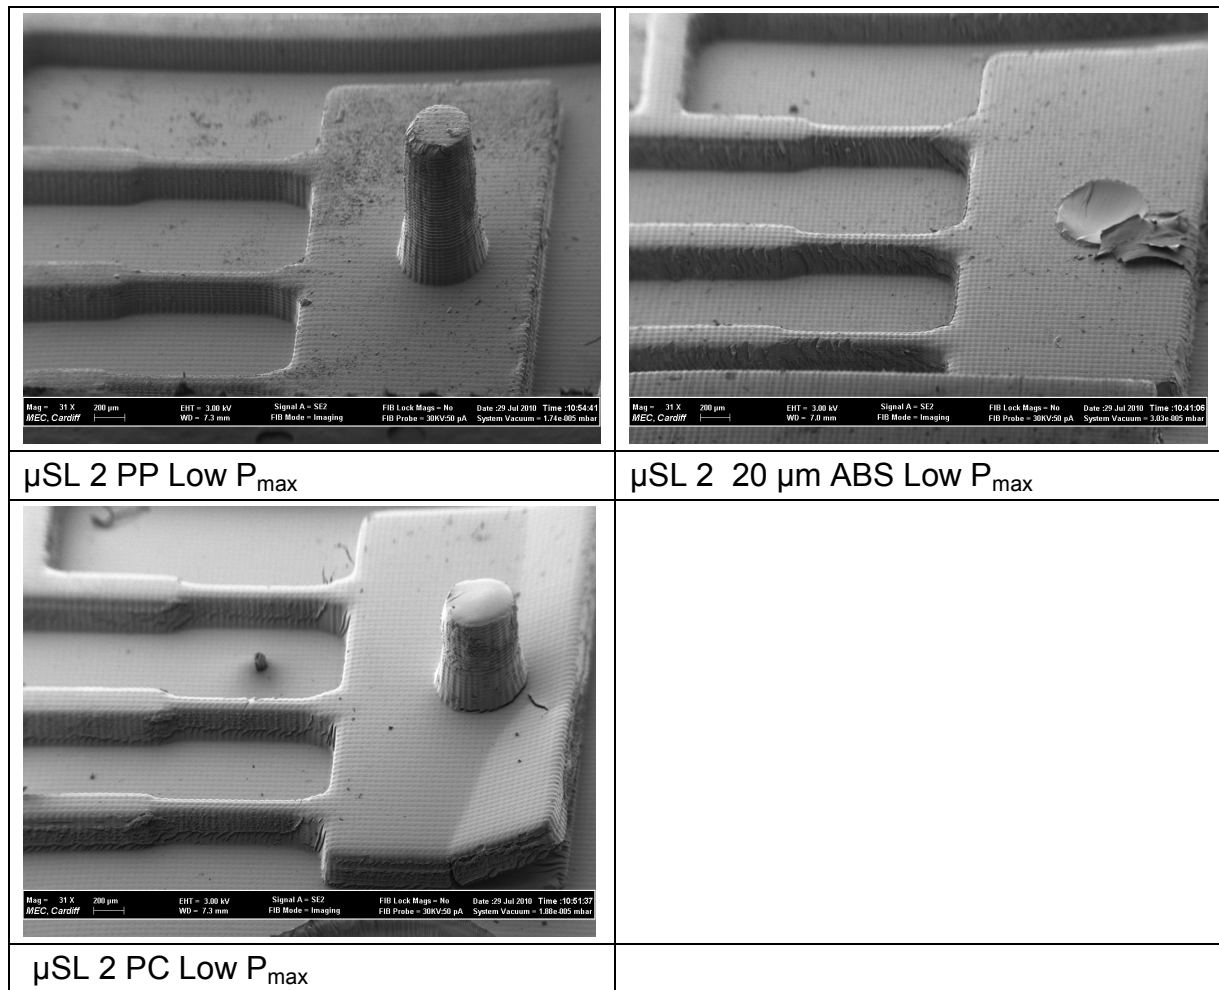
100 µm x 100 µm ribs after moulding using the µSL 2 inserts
